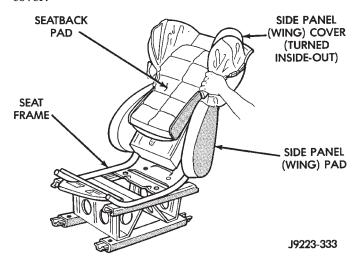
Side Panel (Wing) Covers Inside-Out—Wingback Seat
